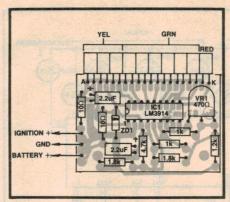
it should only take you a few minutes to assemble the PCB. Take care with component orientation.
